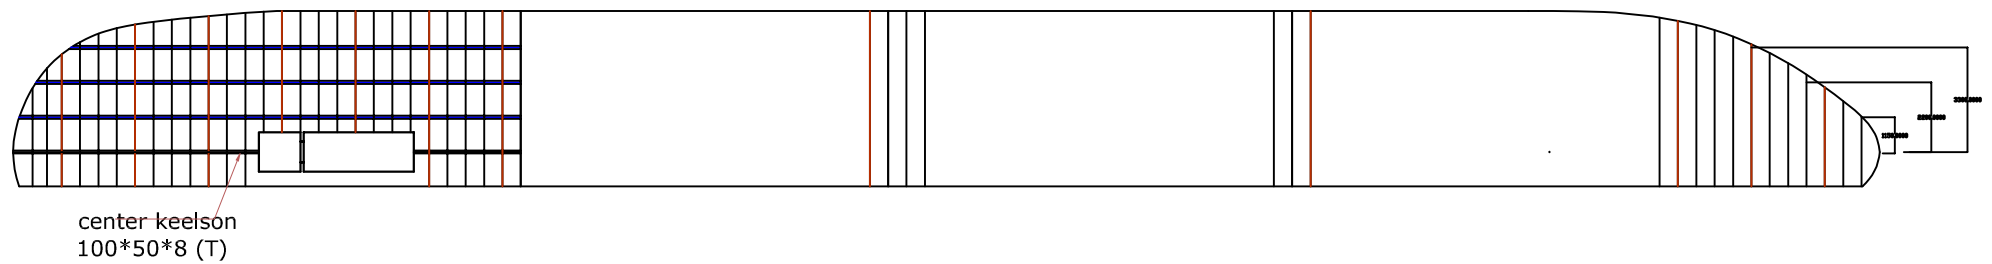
FIGURE : LONGITUDINAL CONSTRUCTION DRAWING
